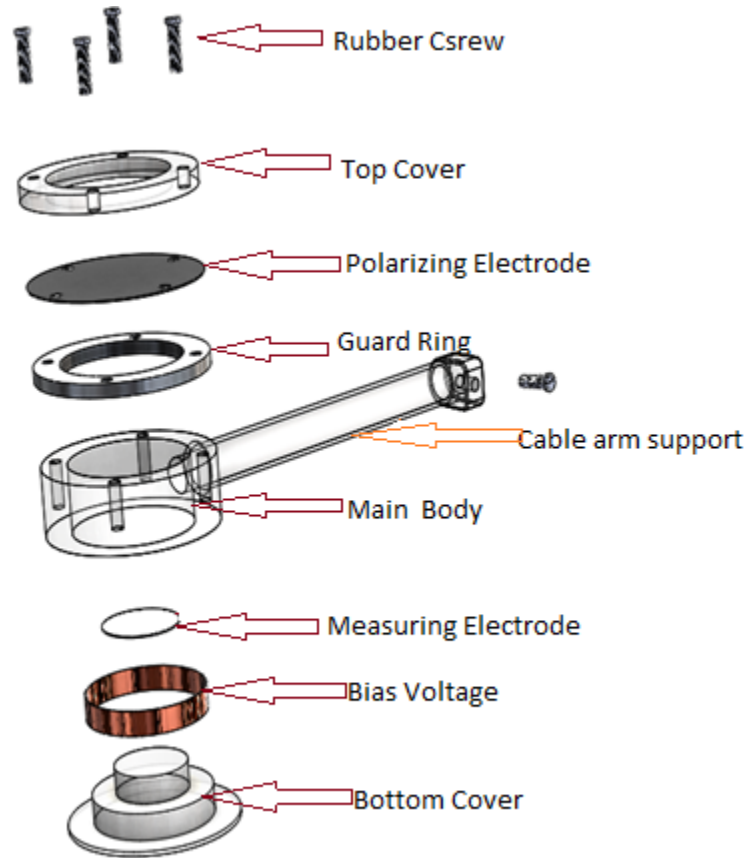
Exploded solid CAD model of the parallel plate ionization chamber
